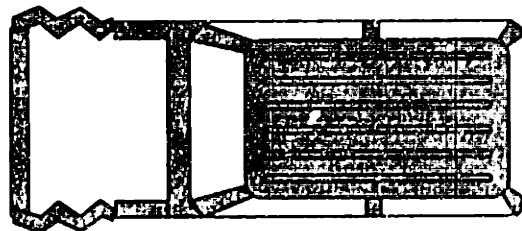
The front end assembly with non-nominal geometry of inner fender
